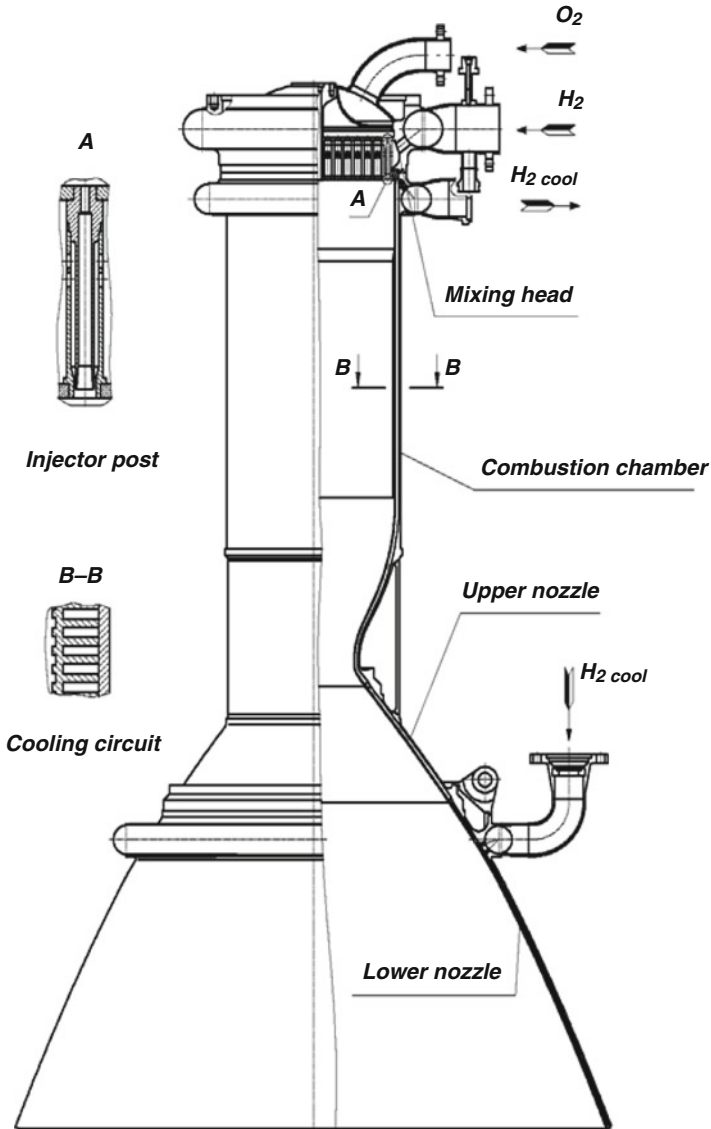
Combustion chamber of the RD-0146 with a ribbed inner surface (detail B-B) [8]
